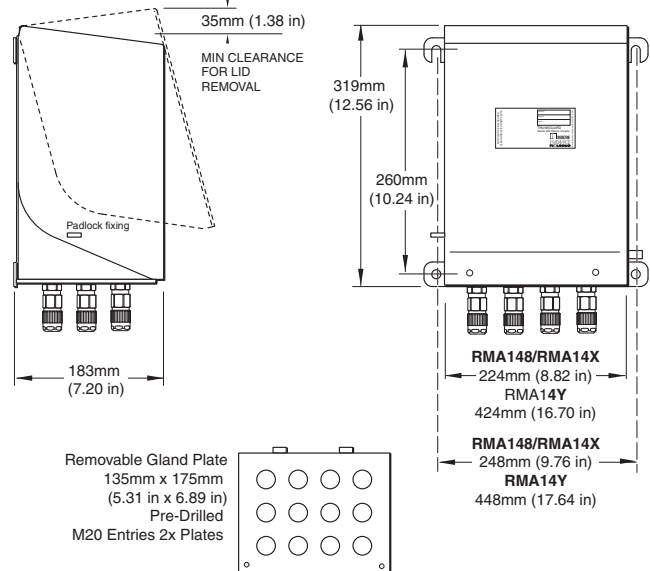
Electro-Polished Stainless Steel 316 Enclosure Installation Dimensions for 4-Spur (RMA124) Device Couplers.
